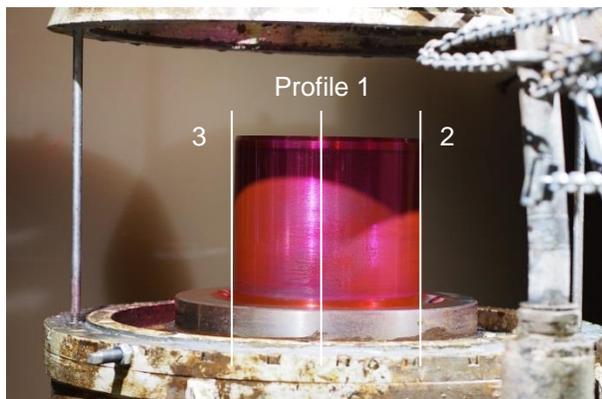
Hard-coated shaft end during crack measurement by non-destructive penetrant testing
